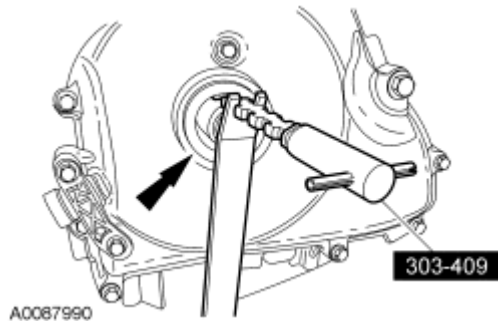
Identifying Special Tool (303-409) And Crankshaft Front Oil Seal
